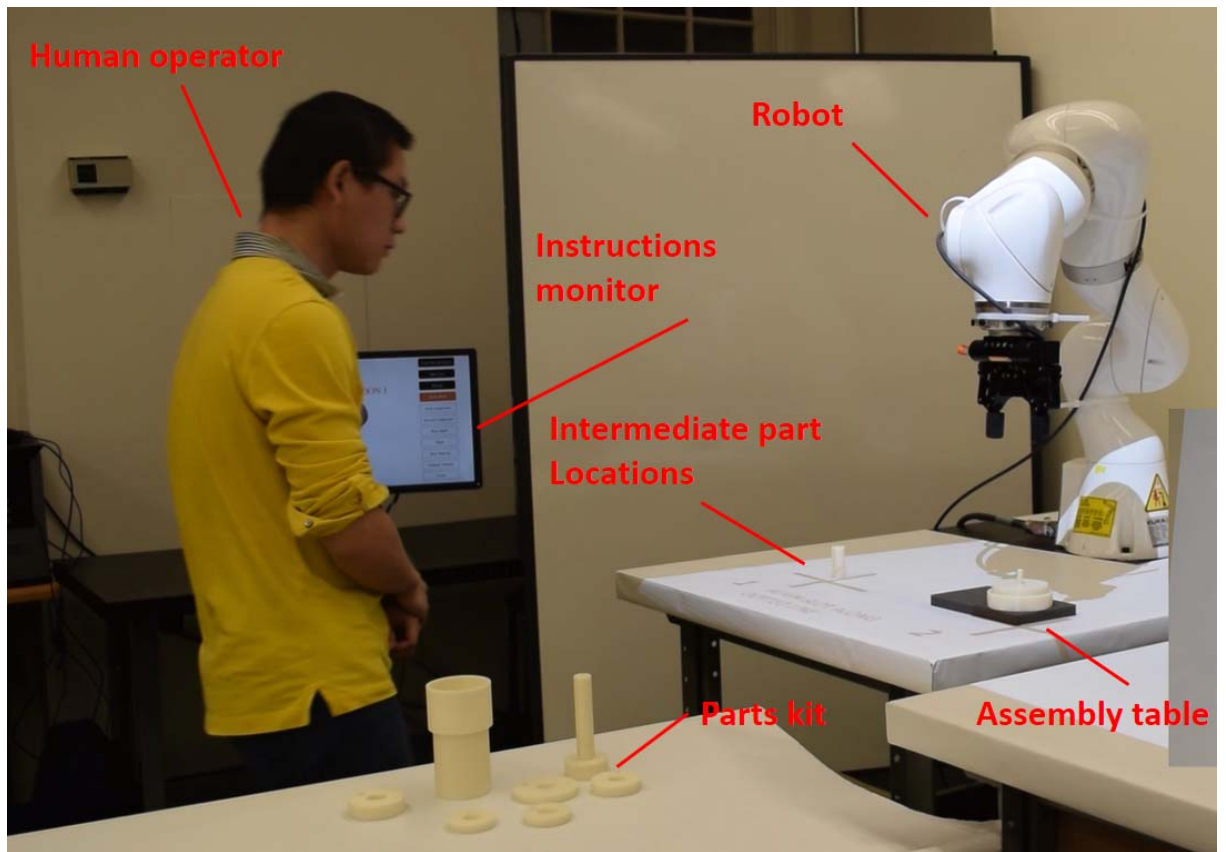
Hybrid assembly cell: Human assisting the robot in resolving a pose estimation problem during an assembly task. Human pick a part and place the part in a known pose and location. Robot recognize the location and pick up the part and perform the task
